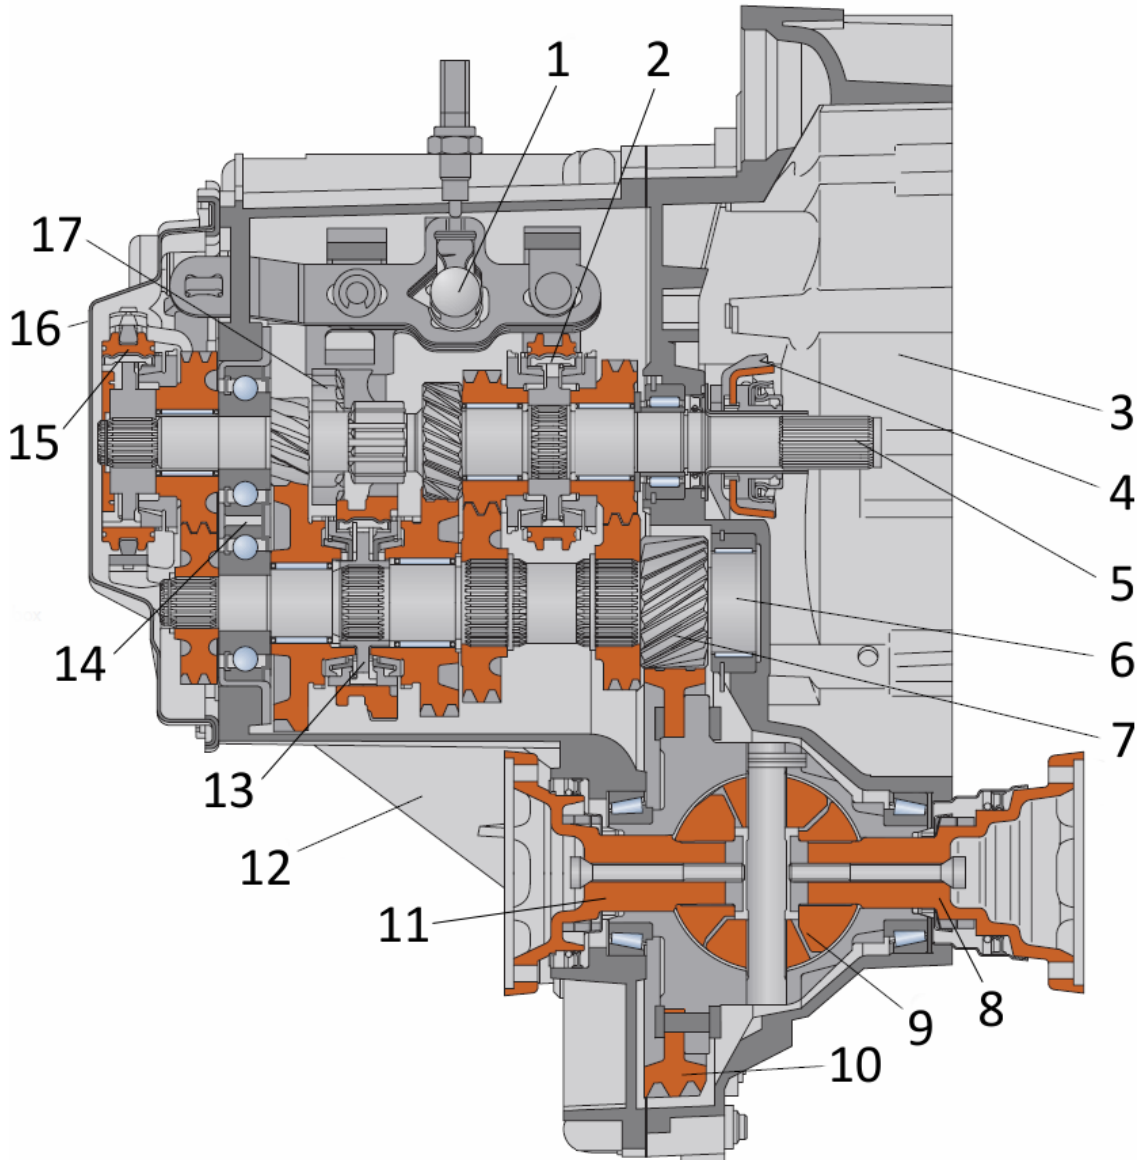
Section view of the 5-speed MQ200 gearbox [37]
